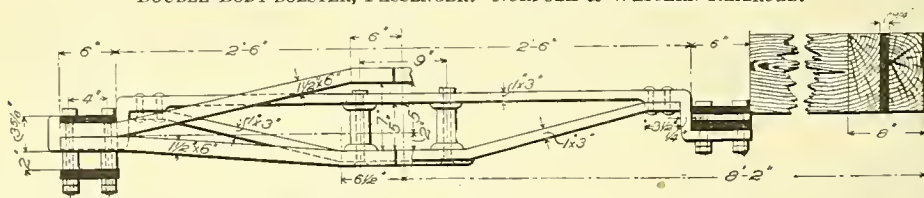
Cross Section of Bolsters, Half Elevation of Center-plate Truss and Full Elevation of Side-bearing Truss.
